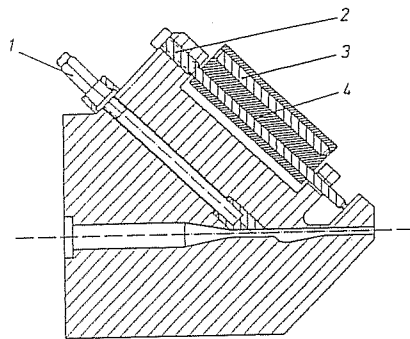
Flat slit die with heated die bolts for gap adjustment (Welex) [61], 1 Bolt for the choker bar adjustment, 2 Bolt for the lip adjustment, 3 Bolt heating, 4 Heating block
